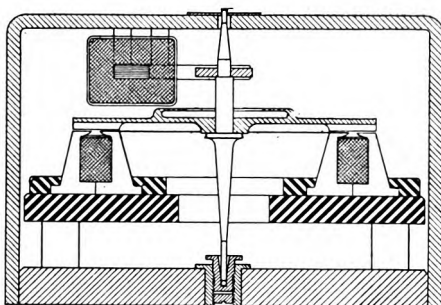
Sectional View of 5,000-cycle Synchronous Motor.
